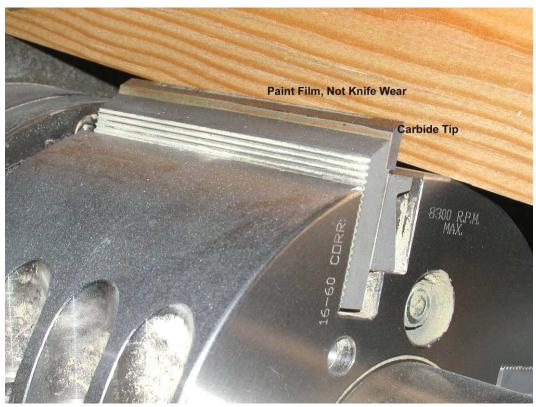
Carbide knife after machining, showing sharp edge with traces of paint residue.
